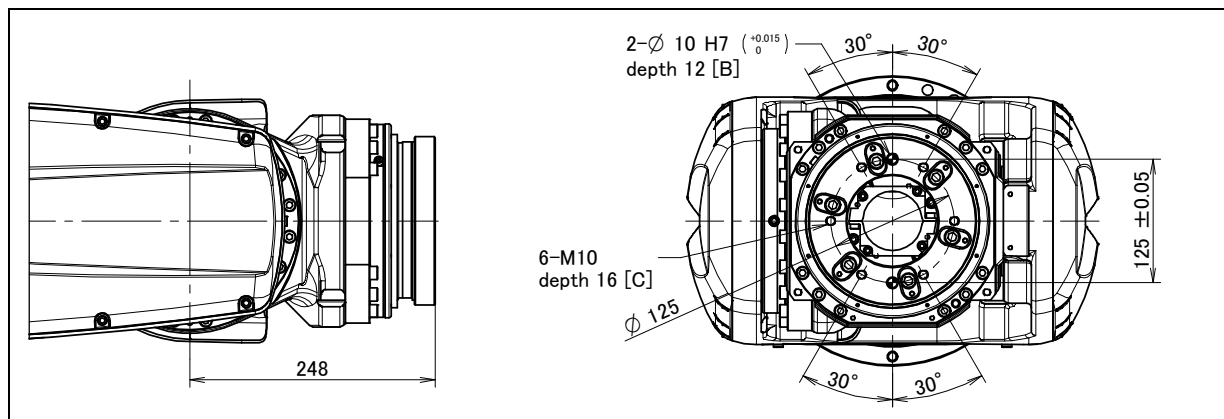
(b) End effector mounting face (Insulated ISO flange)
